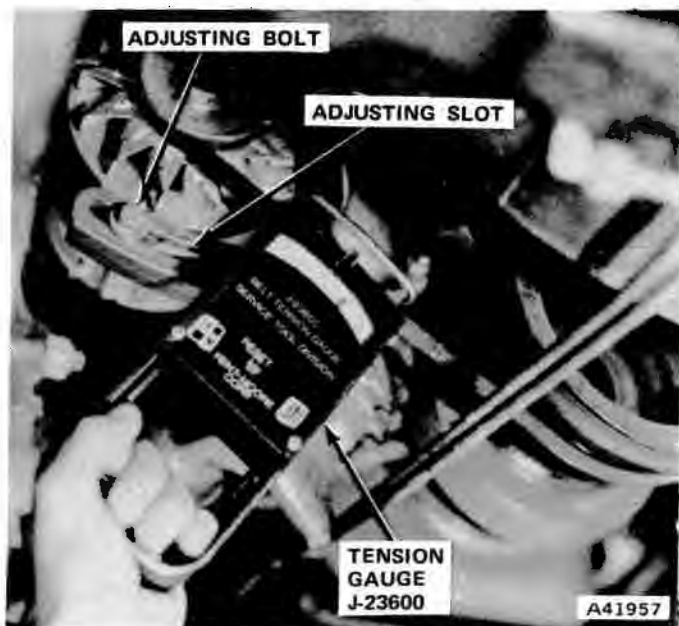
Checking Belt Tension with Gauge J-23600
